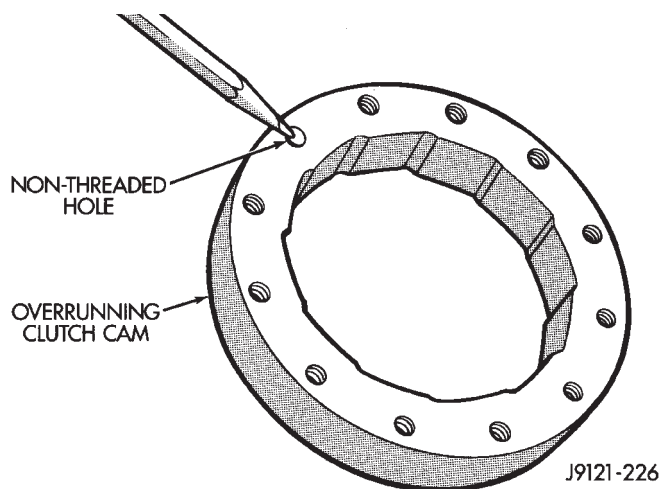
Location Of Non-Threaded Hole In Clutch Cam
